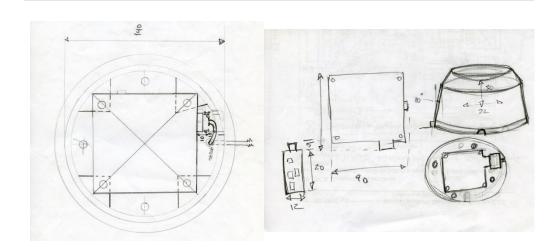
Picture showing example of constructions drawings used for the prototype made by hand.
